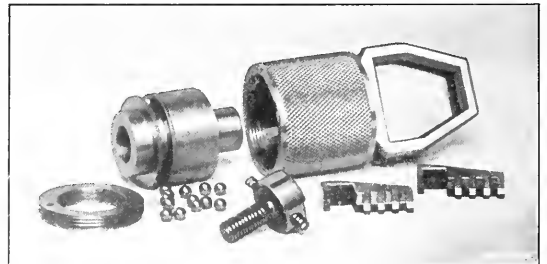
Parts of the Oneida Ball Bearing Drill Chuck
